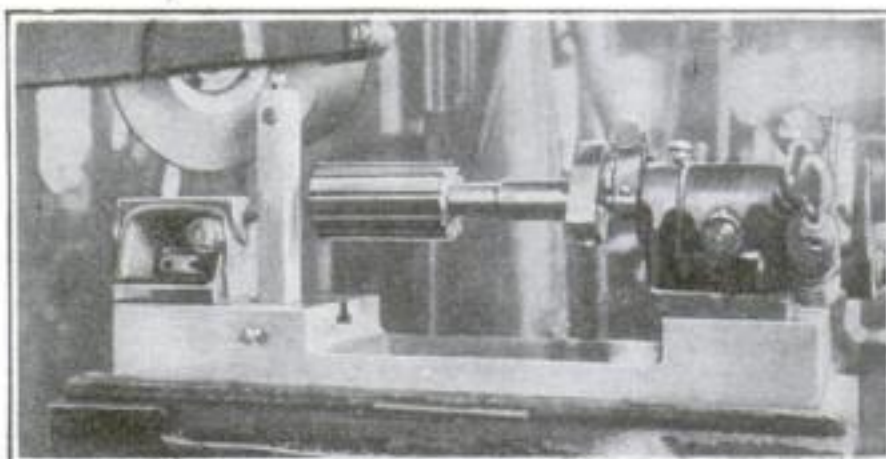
Set-up for sharpening a special cutter. Note the wheel dressing arrangement and the plate for holding the index centers
